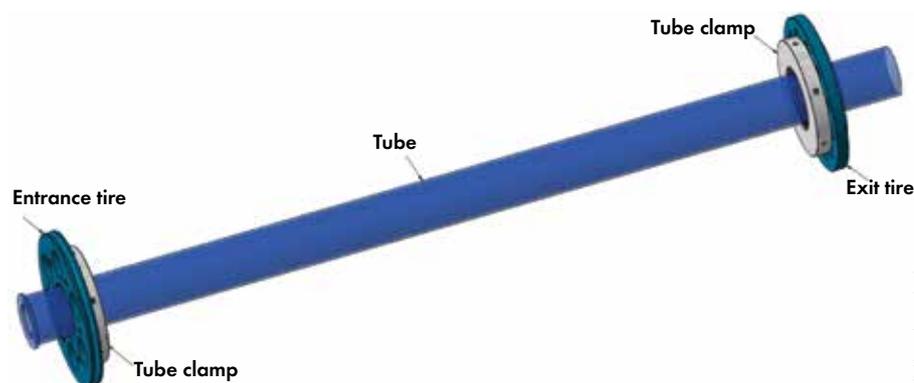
Harper dual-material tube assembly uses tube clamps instead of welded-on flanges.
